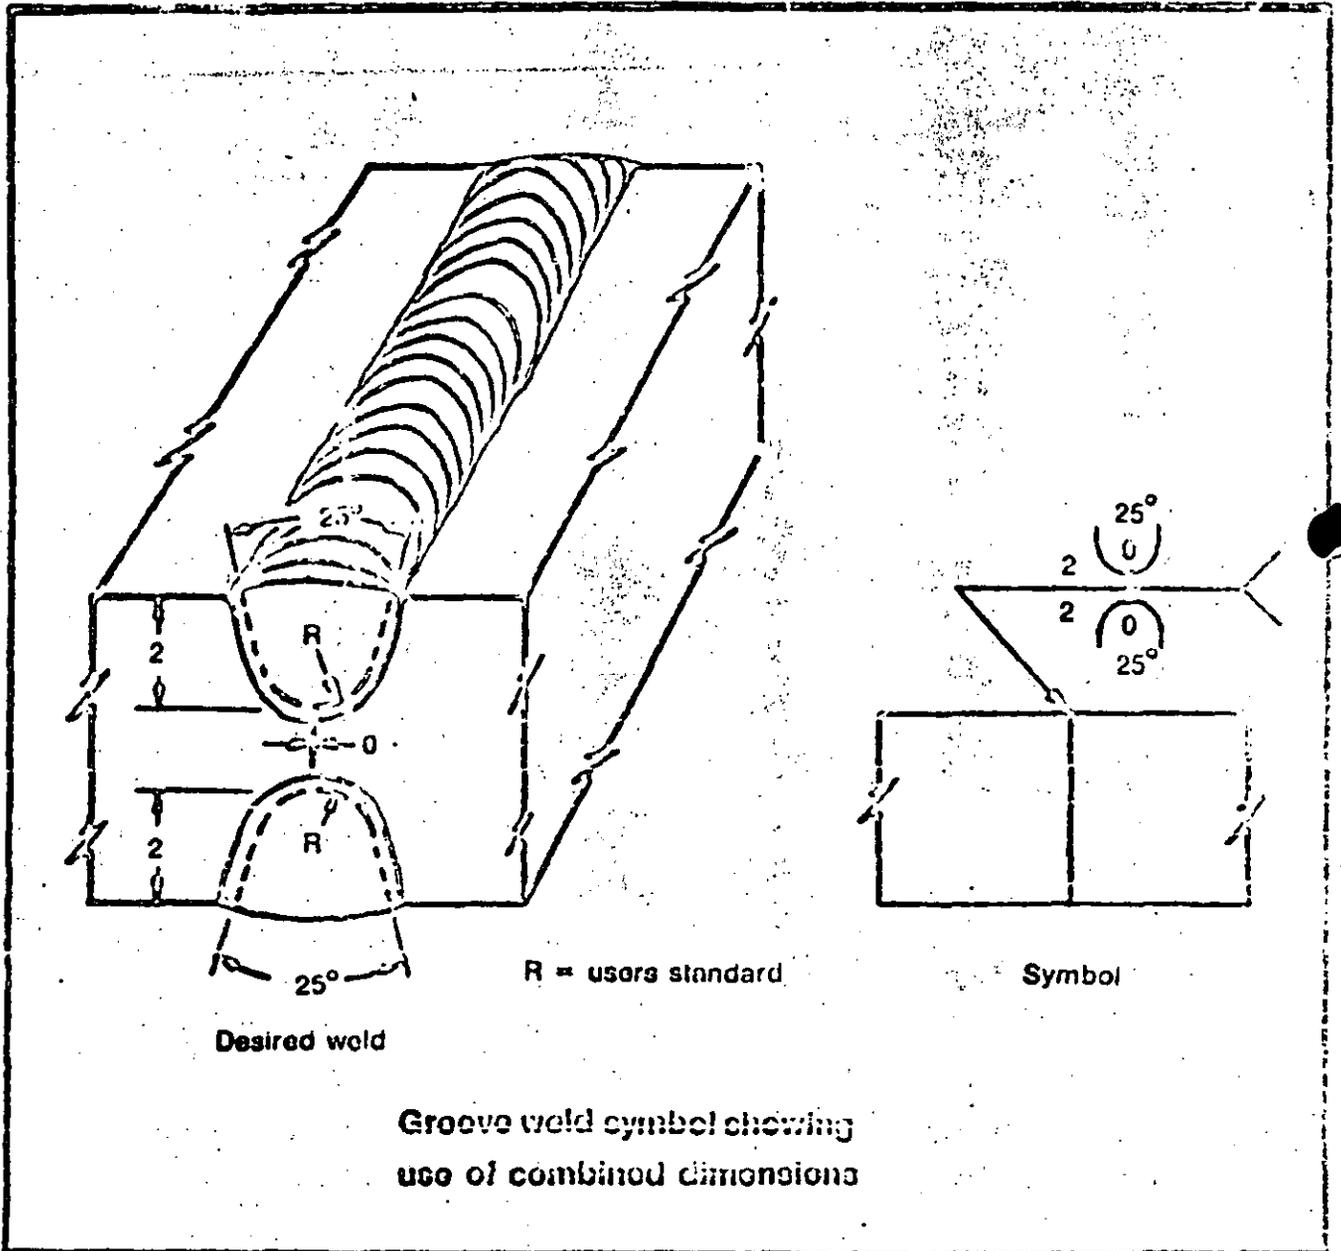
Application of dimensions to groove weld symbols.
